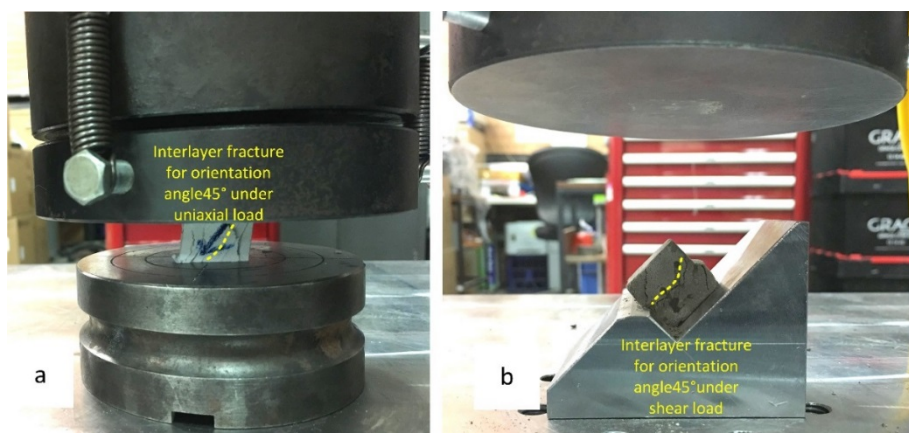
24: Fracture in the printed 45° specimens in both (a) compressive test for ZP 151 and (b) shear test for CP.
